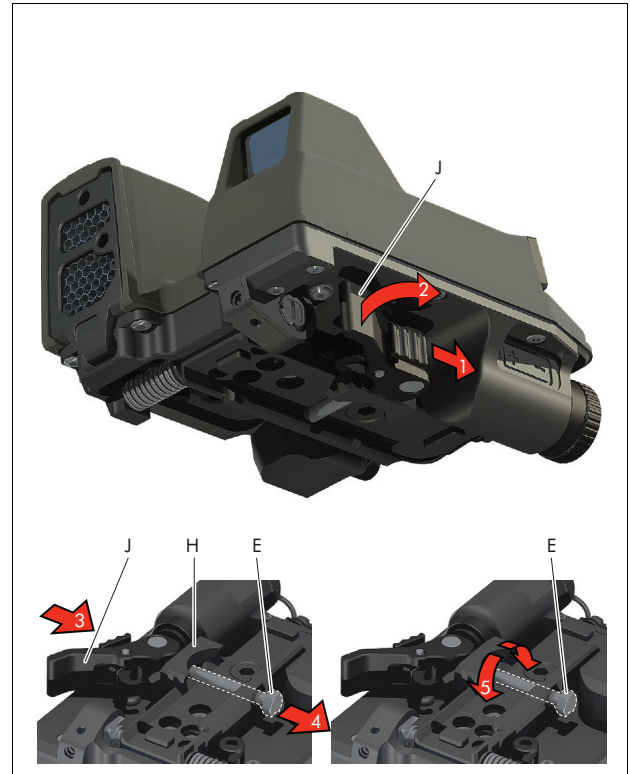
d - Adjust the clamping force of the FN® FCU Mk3
